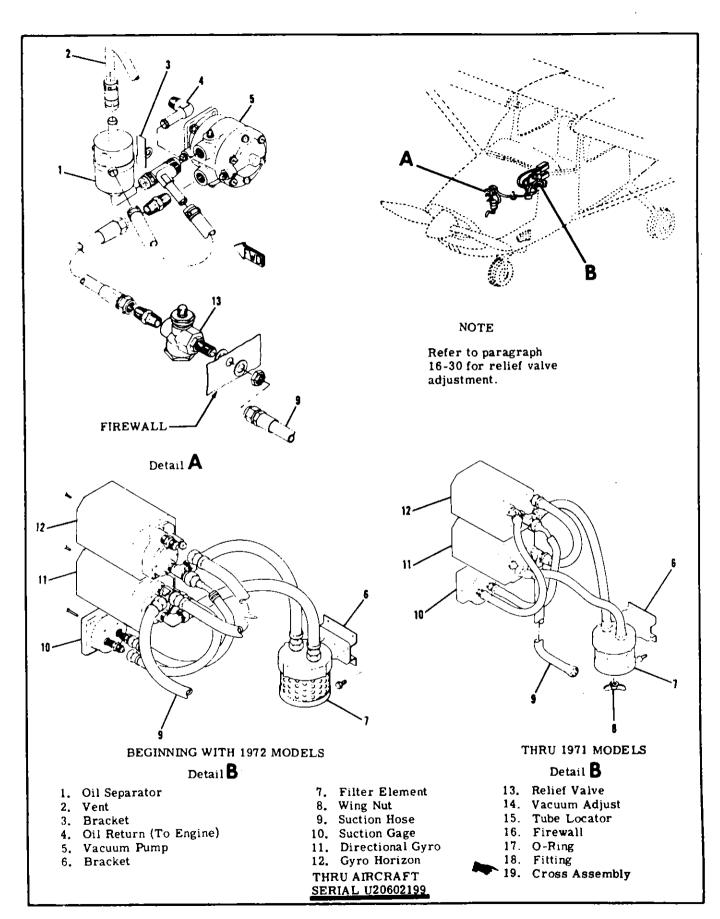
Vacuum System (Sheet 1 of 3) Wet System
